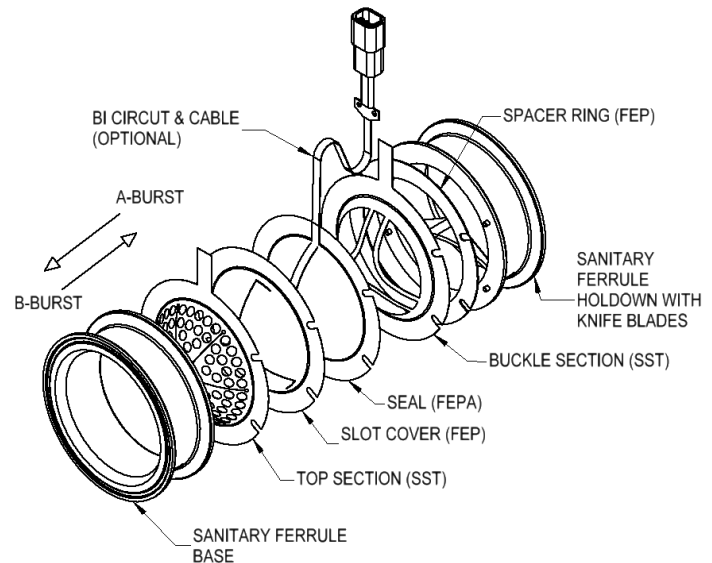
Rupture Disc Assembly (Sanitary Holder Type Shown)
